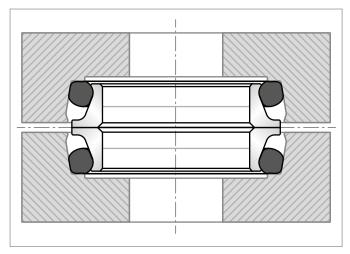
Both halves of the Mechanical Face Seal group have 0-Rings slipped against the seat and on the seat bottom
